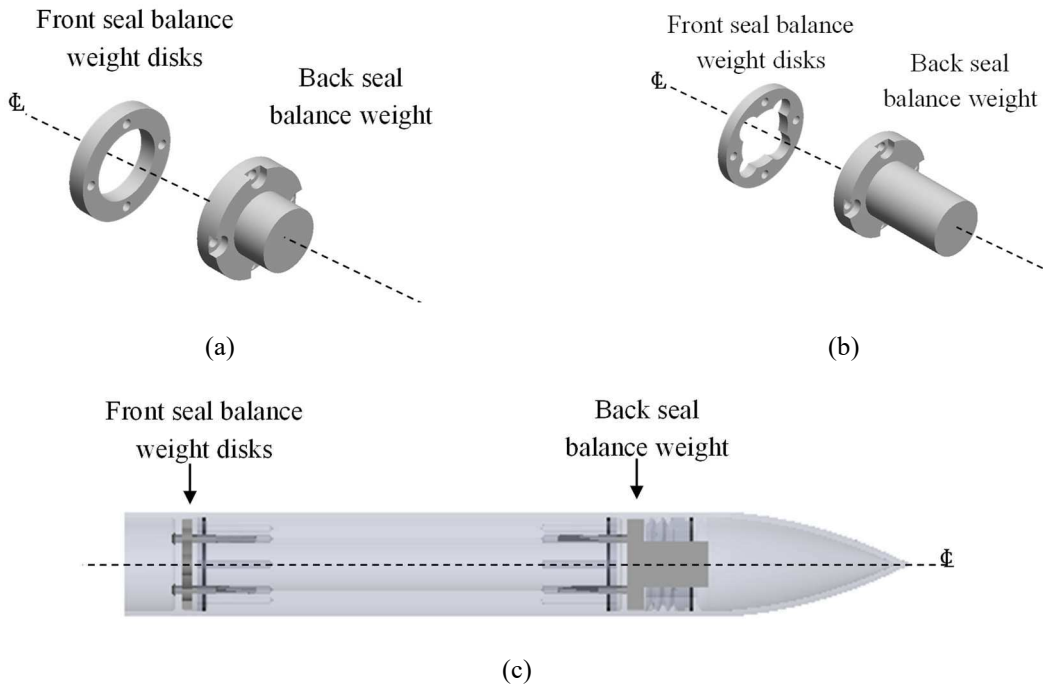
A 3D view of the balance weights designs for (a) the smooth surface assembly and (b) for the porous cylinder assembly. (c) Displays the installation of the balance weights in the front and back seals.
